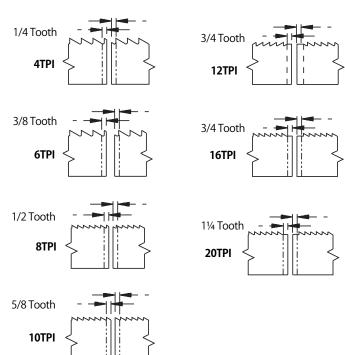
Tooth Spacing (TPI = Teeth per inch)
